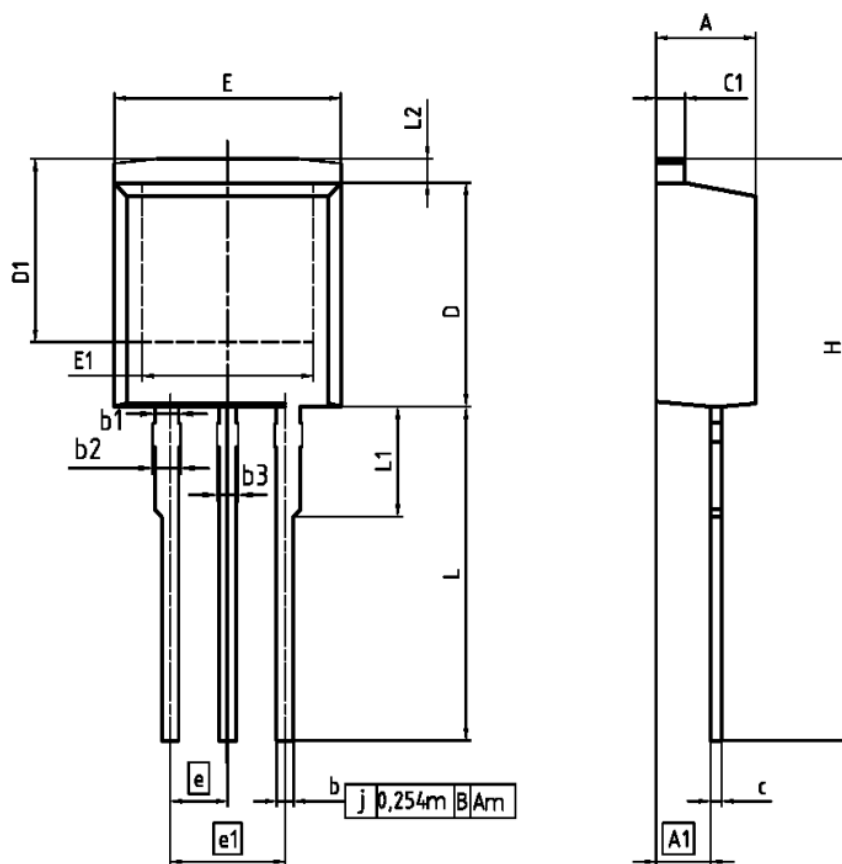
Outline PG-TO-220 FullPAK dimensions in mm
